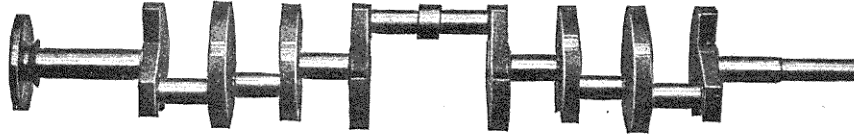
Crank shaft of the six-cylinder "Hexe" engine, built by Achenbach & Co., Hamburg.
